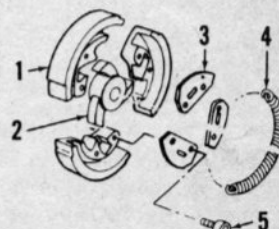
Exploded view of clutch shoe assembly used on models SP125 and SP125C.
